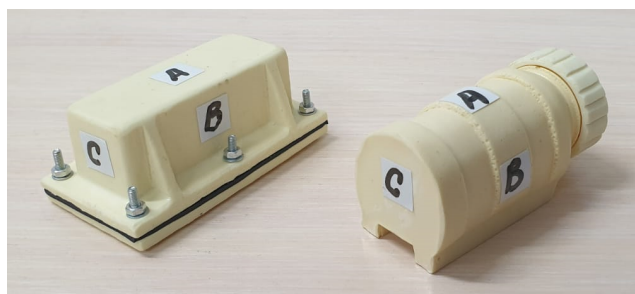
Compression load sides: left – rectangular housing; right –cylindrical housing
